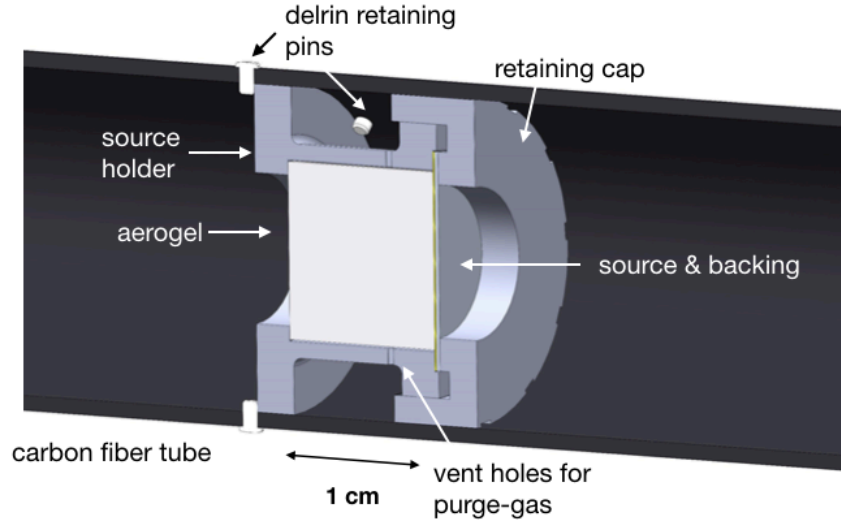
Engineering drawing by TUNL engineer Matthew Busch of source holder in carbon fiber tube.
